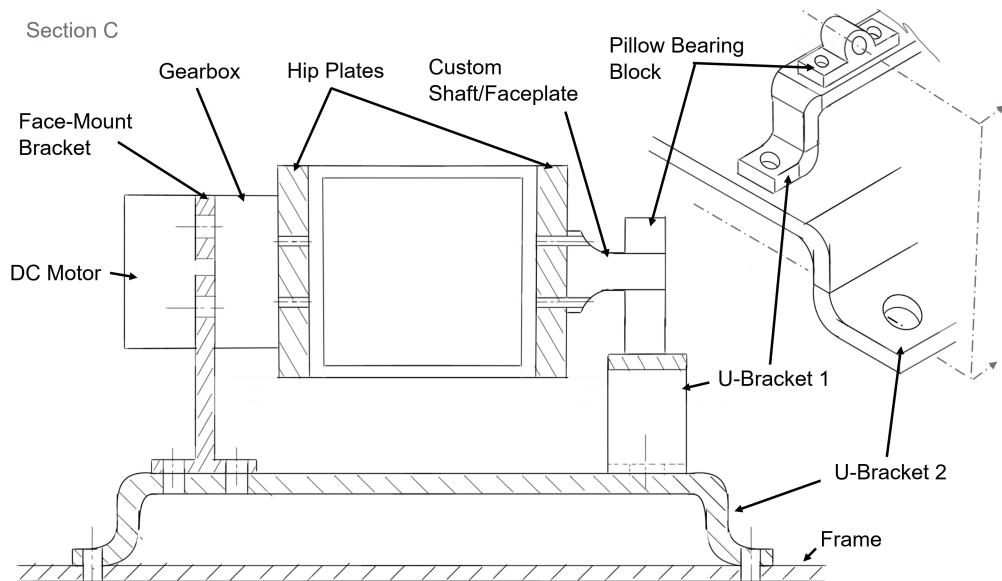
Crab Side Section View (Section C) - U-bracket Mounting
